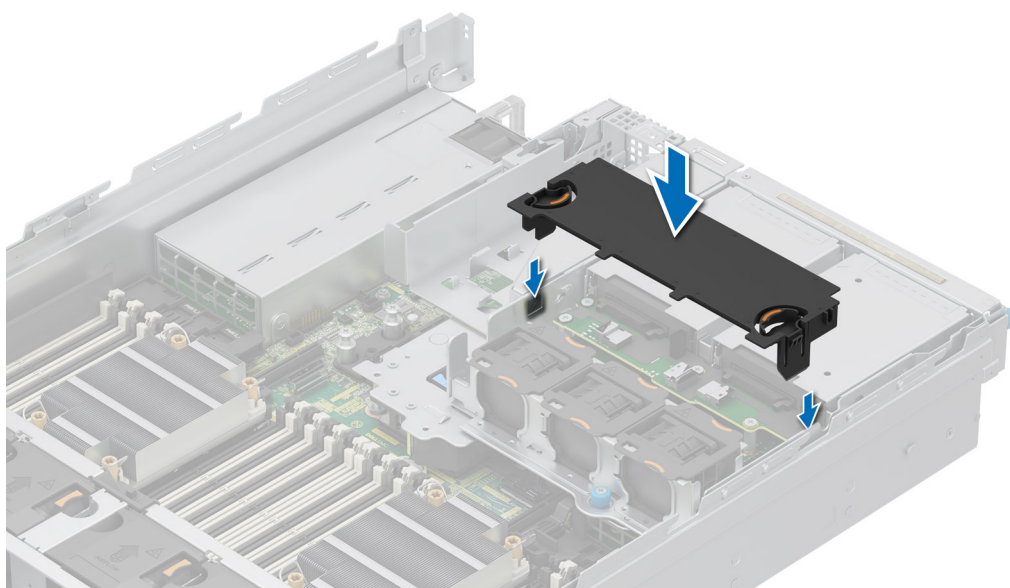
Installing the 4 x 2.5-inch rear drive module air shroud
